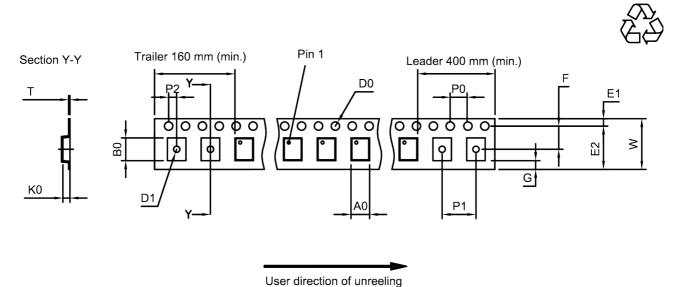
Drawing of tape (first-angle projection) with tape dimensions according to Table 1.
